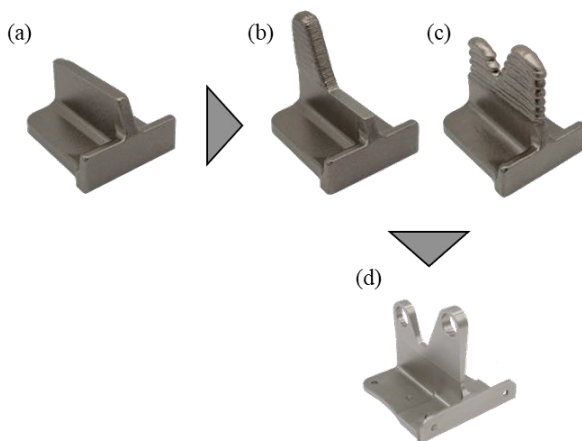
(a) forged T-section, (b) forged T-section with added p-LMD structure, (c) forged T-section with added WAAM structure and (d) final machined hybrid Ti-6Al-4V part.
